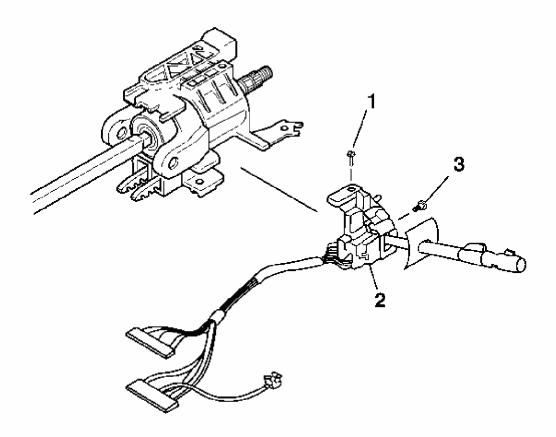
View Of Turn Signal & Multifunction Switch Assembly Courtesy of GENERAL MOTORS CORP.
